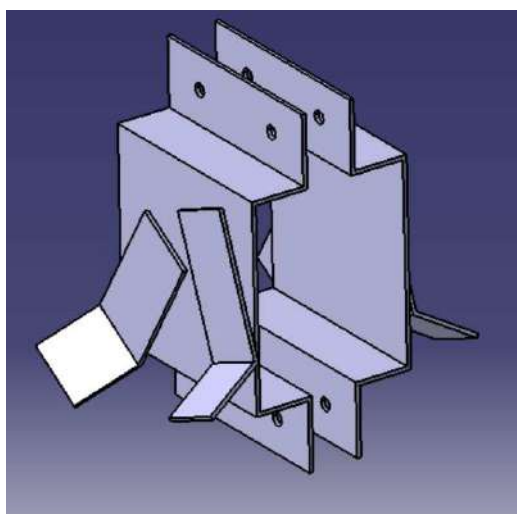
Current fastener bracket design to connect braced members with tie member cross arms.
